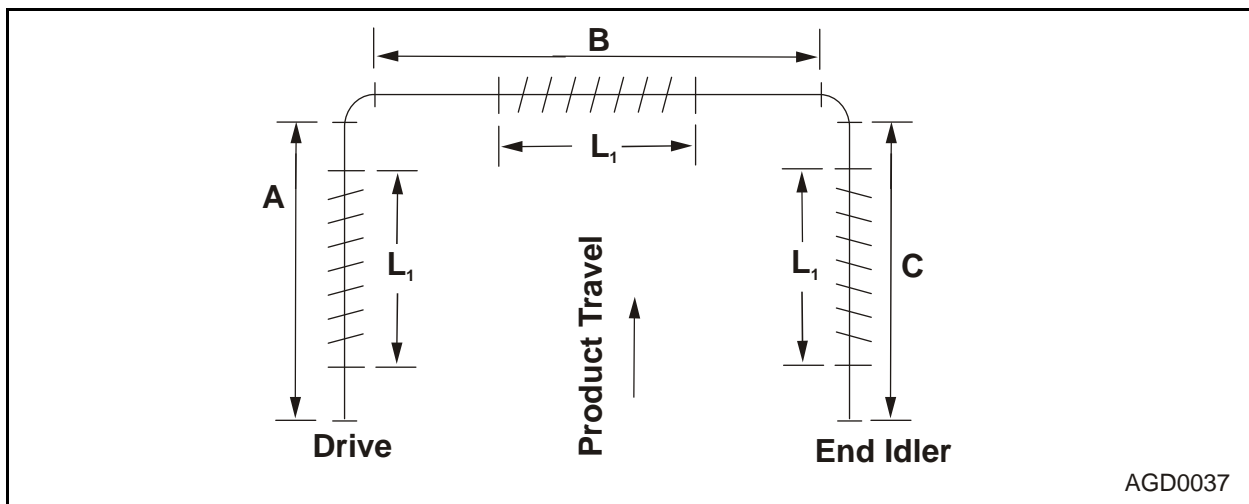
7 Calculating EP - Straight Conveyor with 2 Curves & Skewed Rollers
